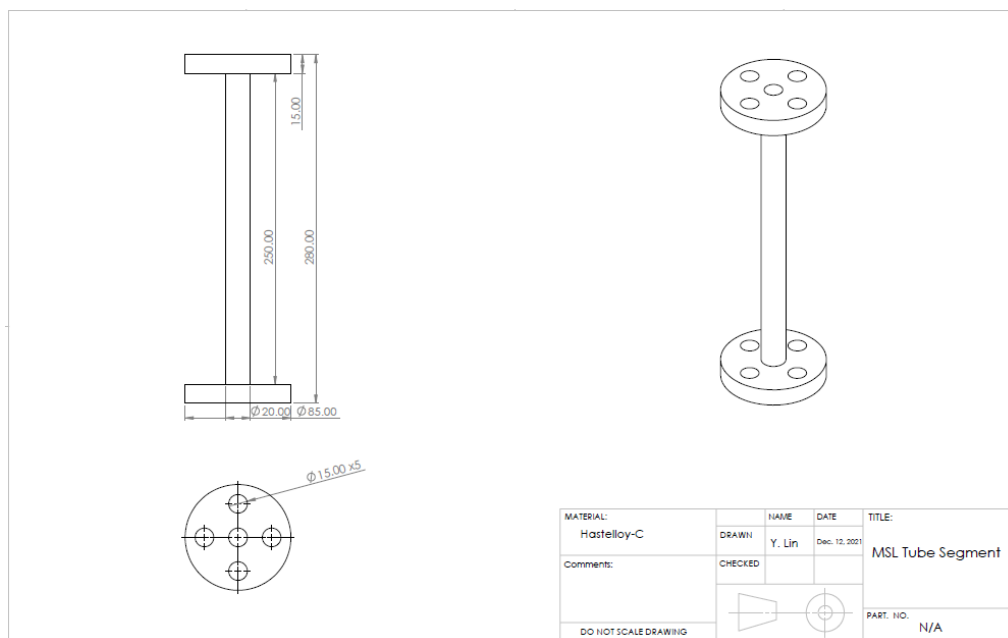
Engineering Drawing of MSL Tube Segment.
